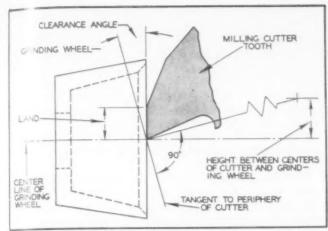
Enlarged view of the flat land produced by grinding the clearance angle with a cup type wheel.
